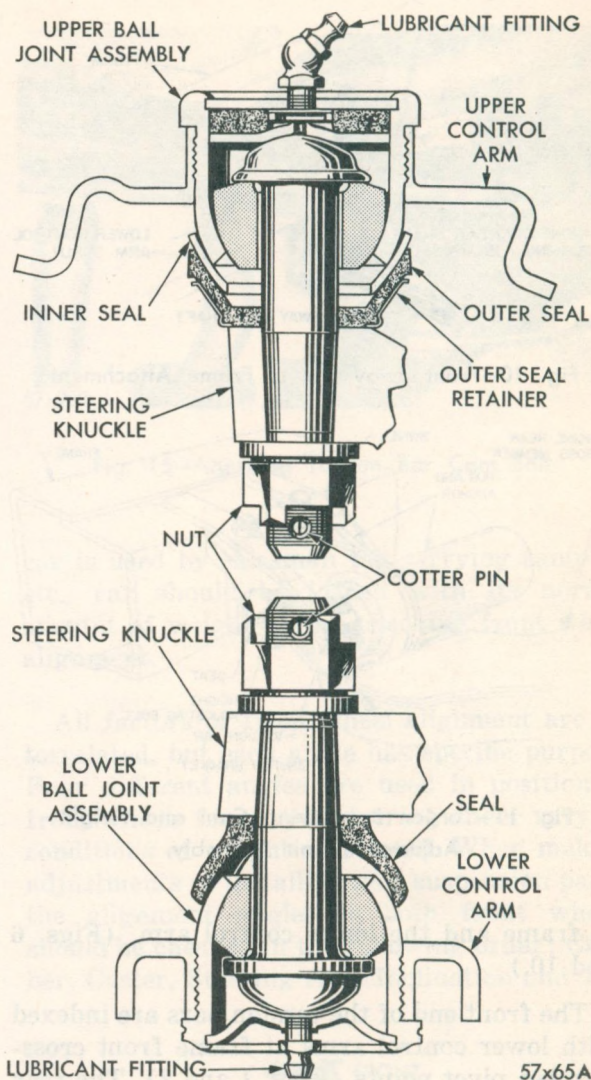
Upper and Lower Steering Knuckle Ball Joint Assembly
